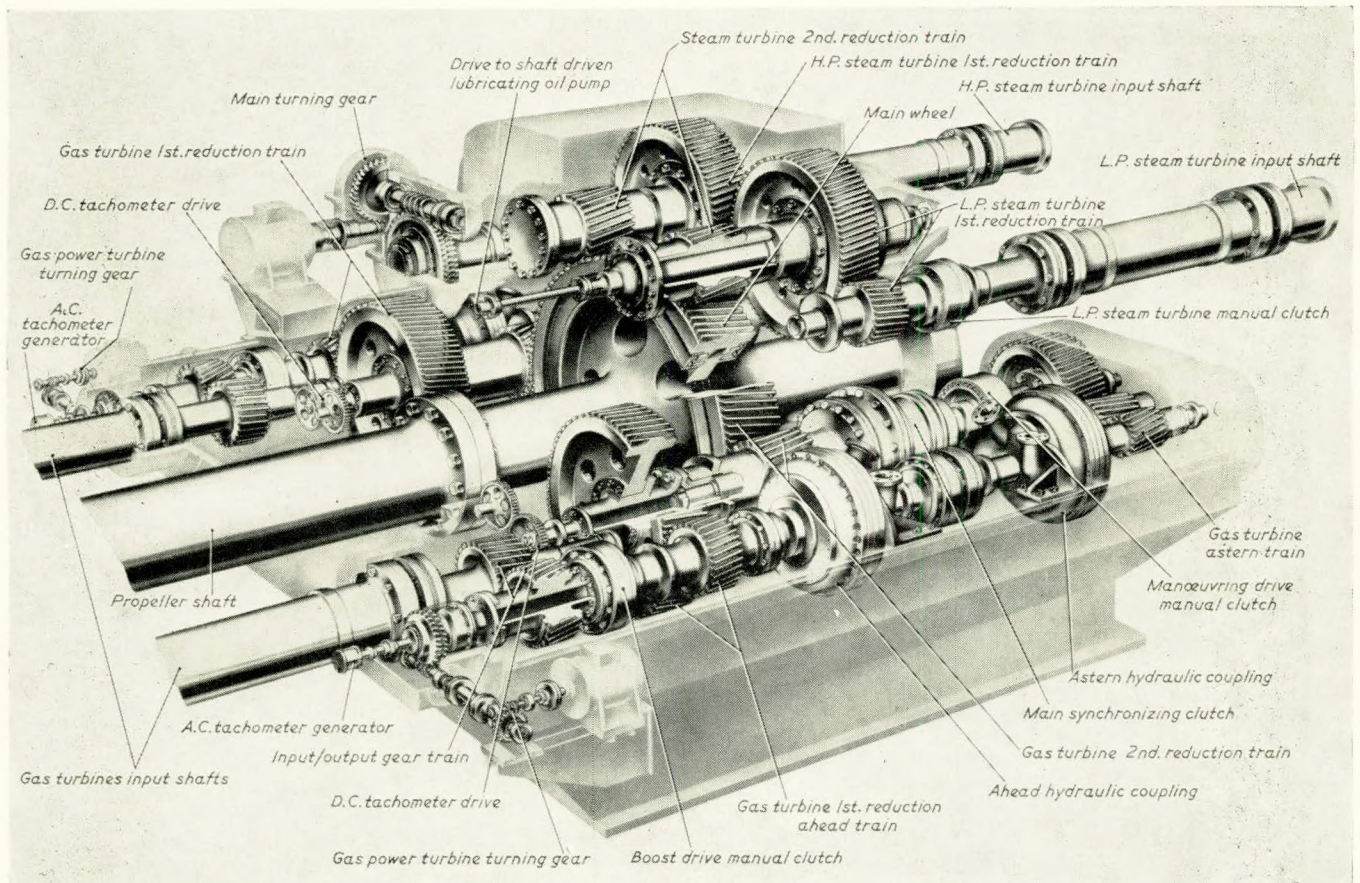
Y.102A—Port gearcase, inboard gas turbine gear train
